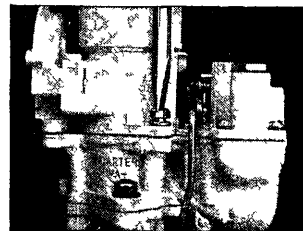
Install air horn and piston using new gasket. Tighten screws evenly. Do not forget lock washers
